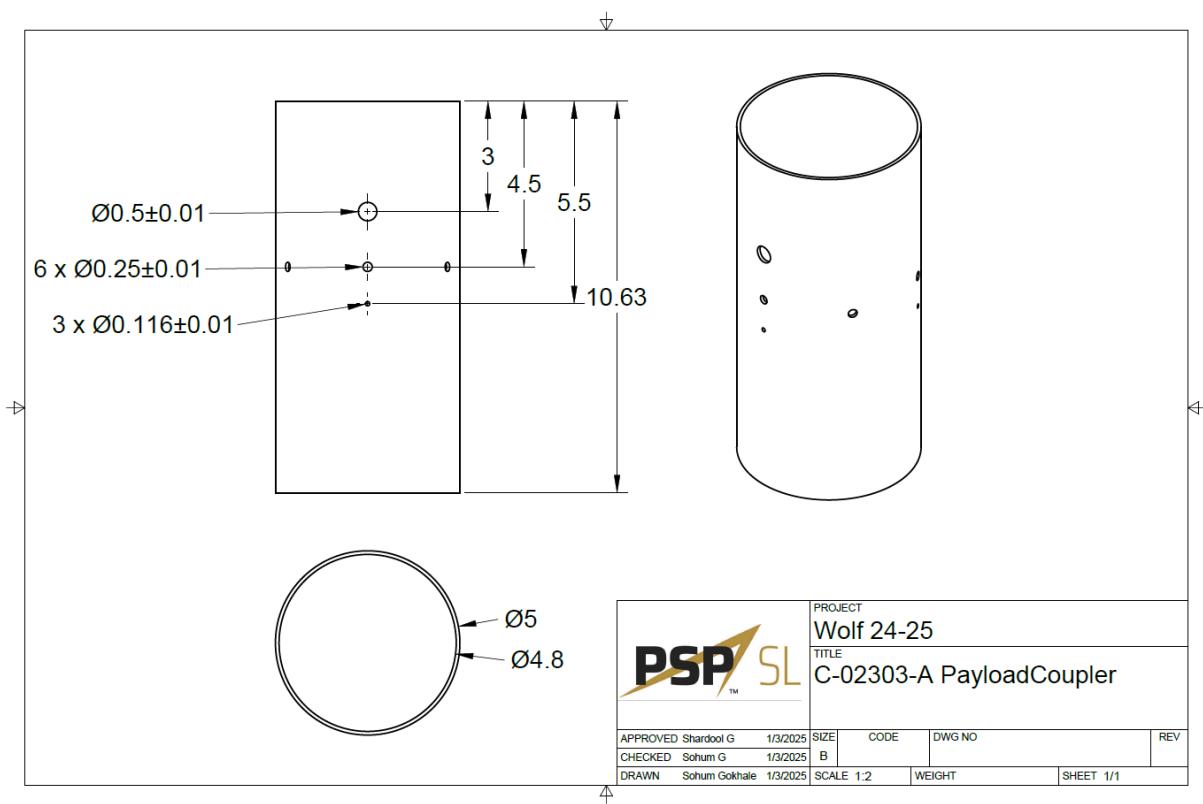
Payload Coupler Technical Drawing
